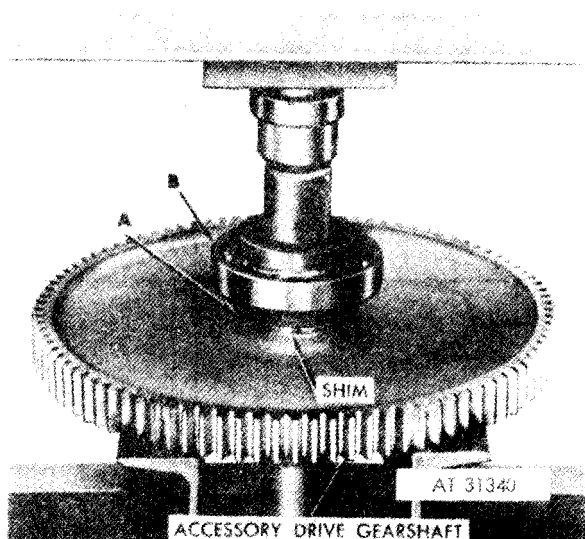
Determining shim thickness for accessory drive bevel gearshaft bearing.
